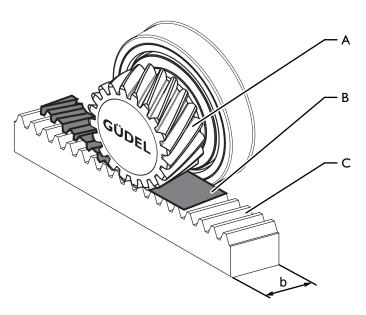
Checking the tooth flank backlash: Paper strip (inexact method)
